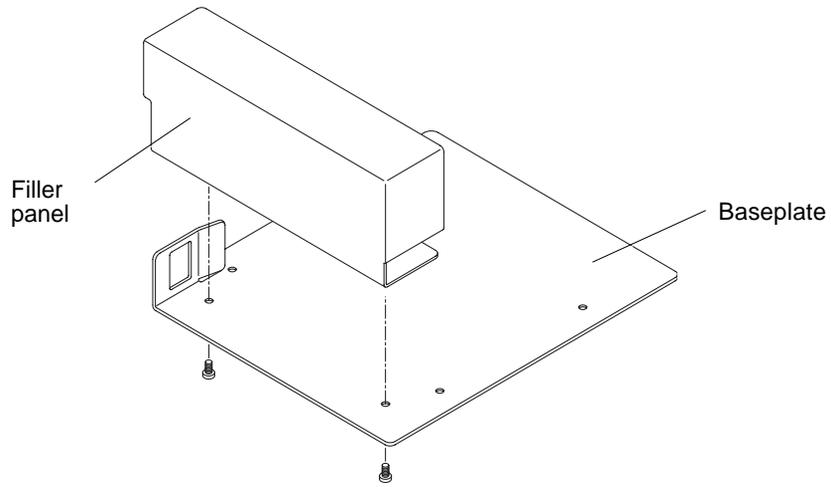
Dismantling the Tape Drive Filler Panel
